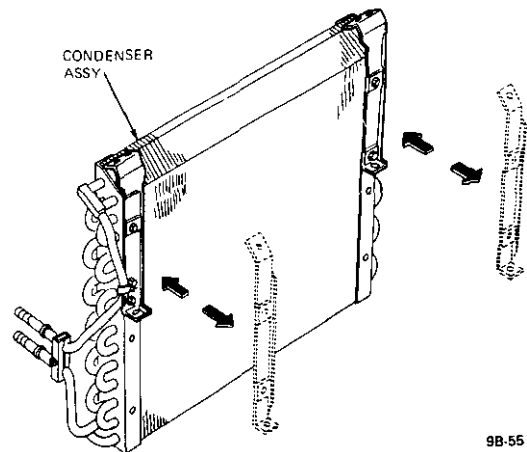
B-75 Condenser Assembly Mounting Brackets Opel 1900 Manta
